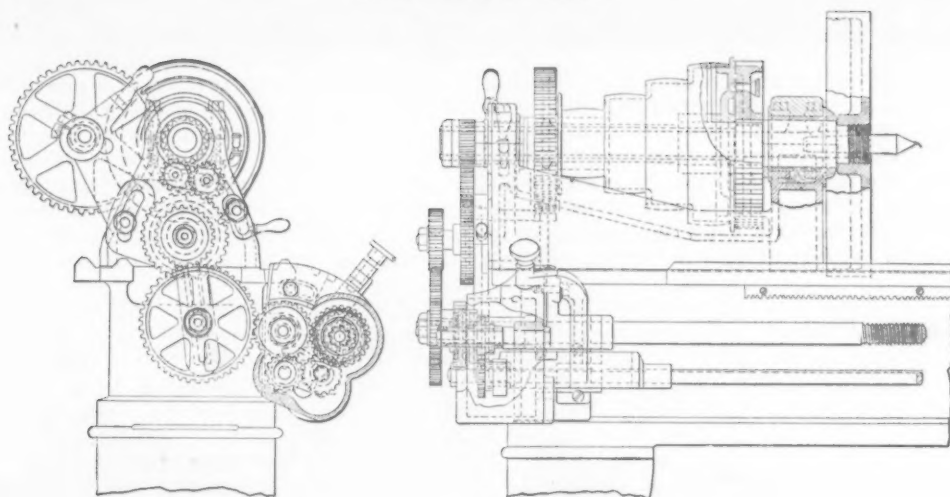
End and Front Elevations, Showing the Drive of the Feed.
